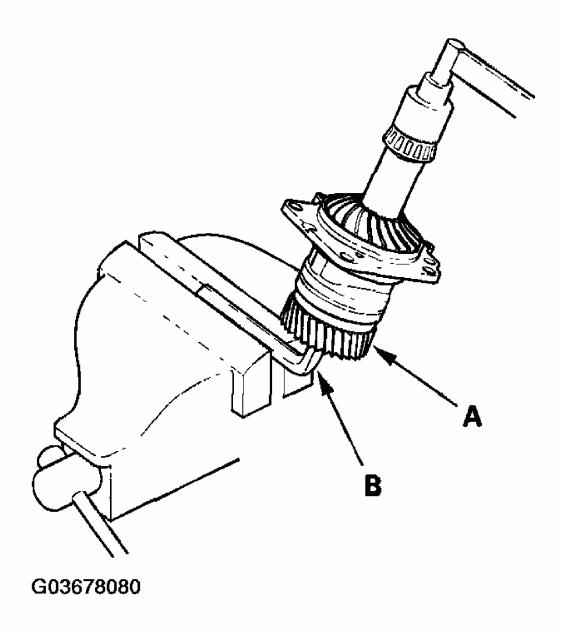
Tightening Locknut Courtesy of AMERICAN HONDA MOTOR CO., INC.
